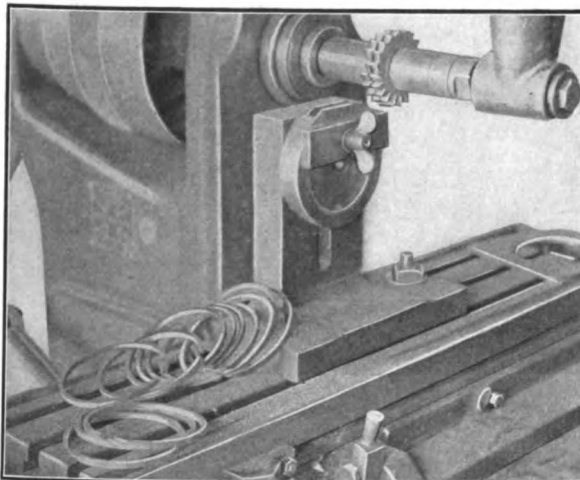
STRADDLE-MILLING FOR SADDLE. PRODUCTION: ONE OPERATOR, TWO MACHINES, 1,500 PER DAY
